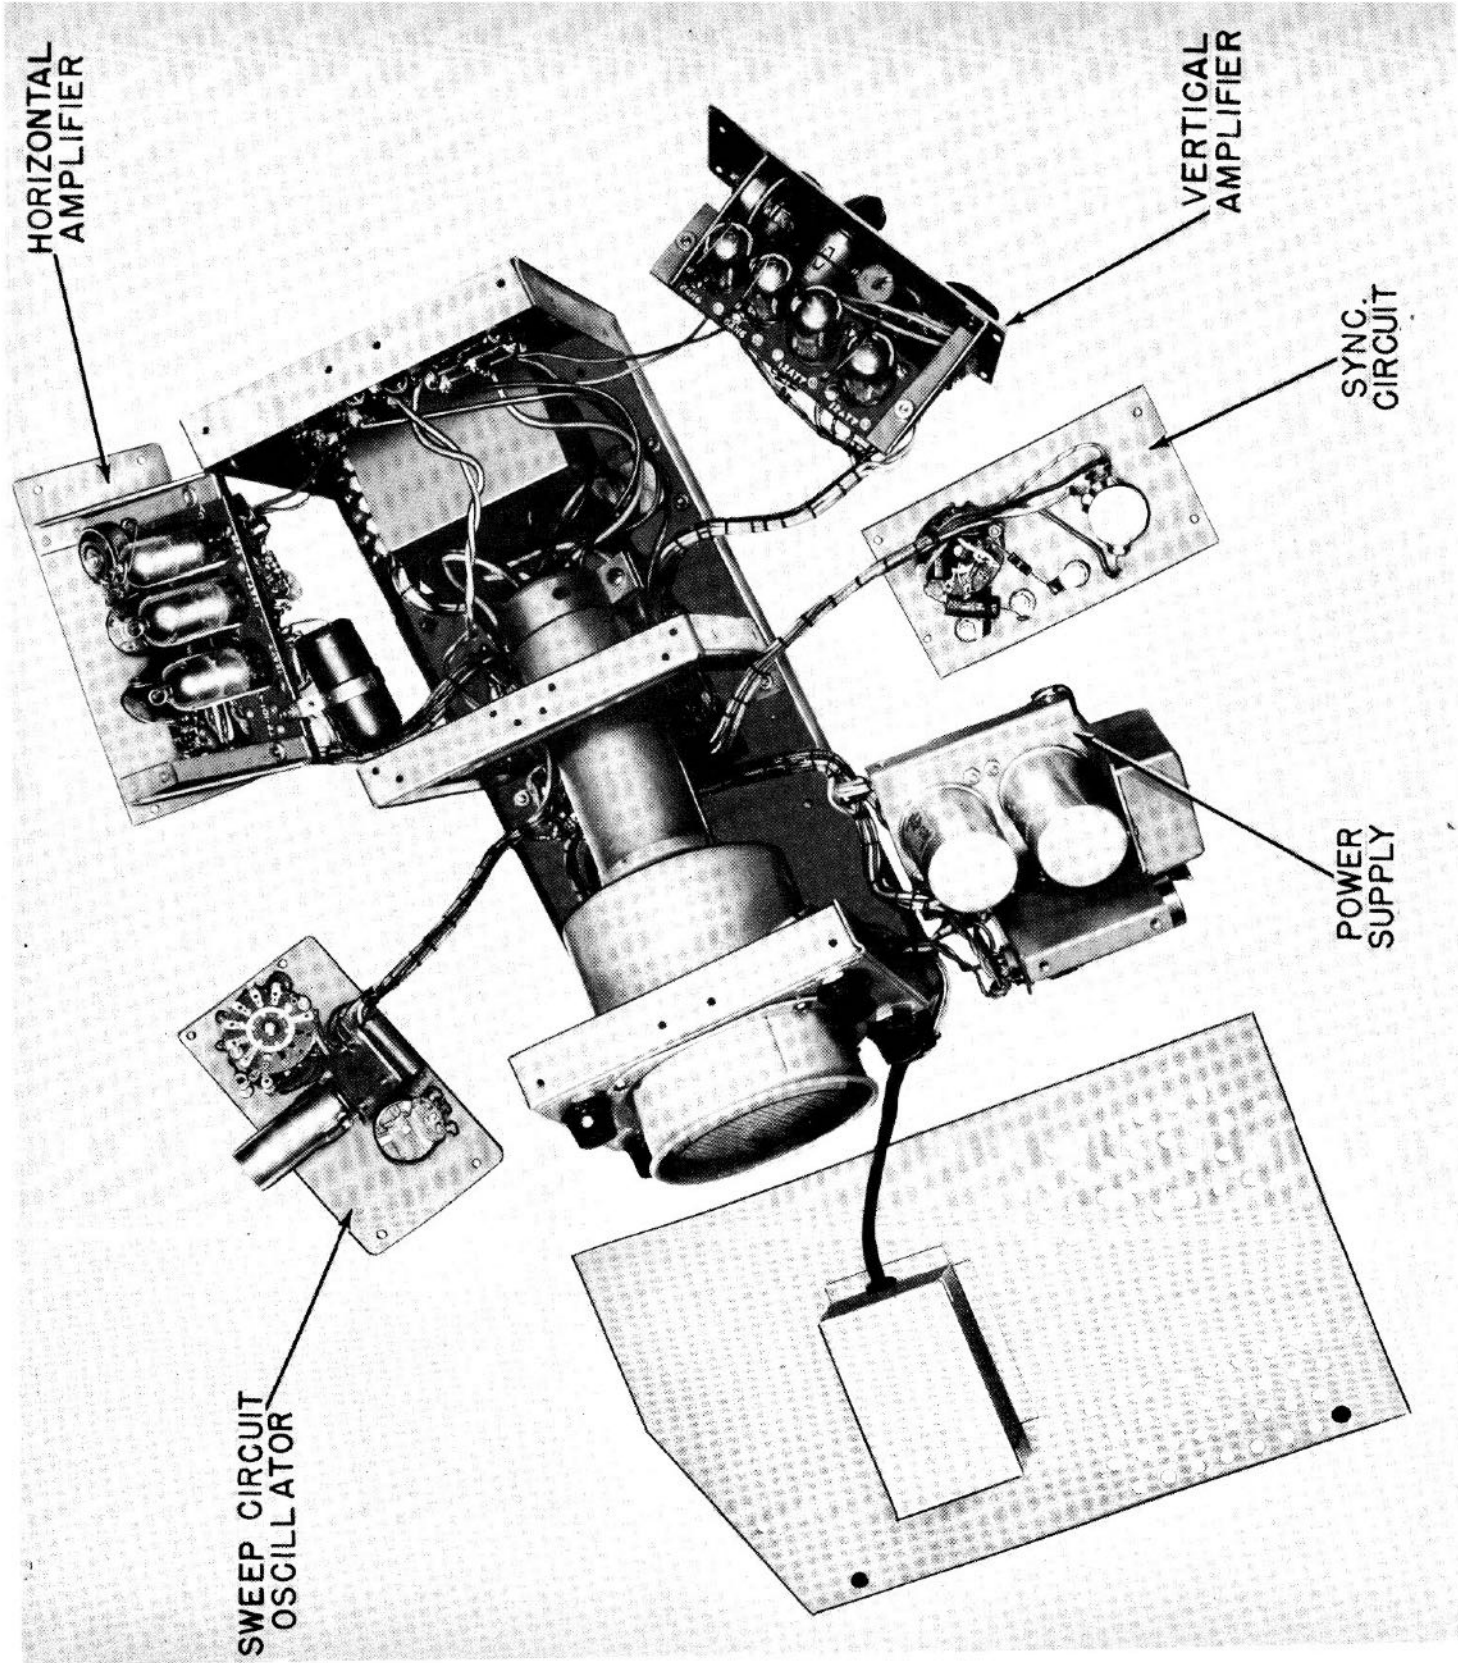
Oscilloscope OS8-C/U, Sub-Assemblies Removed
